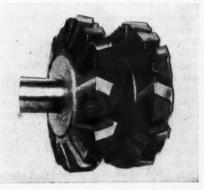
Spar Milling Cutters with Inserted Teeth, Used to Mill Two Spars Simultaneously
